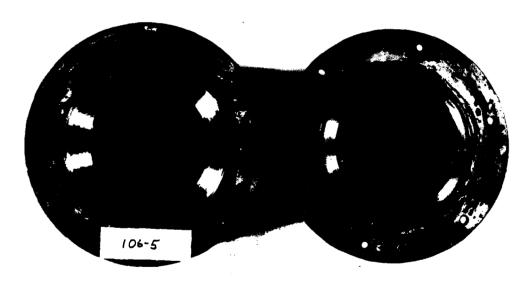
Carbon steel-angular flange test jig with anode after exposure showing corrosion of flange to seal.
